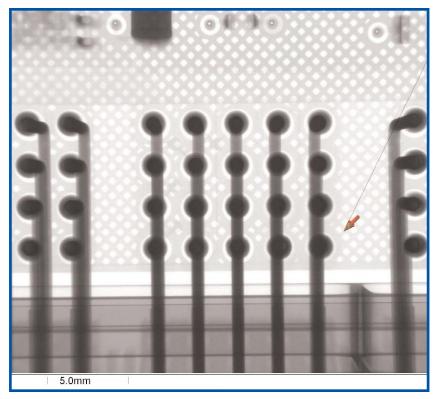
A har-busHM+ connector after assembly and prior to reflow soldering. In this x-ray image of the board, the paste deposit visible on both sides of the board and in the hole.
